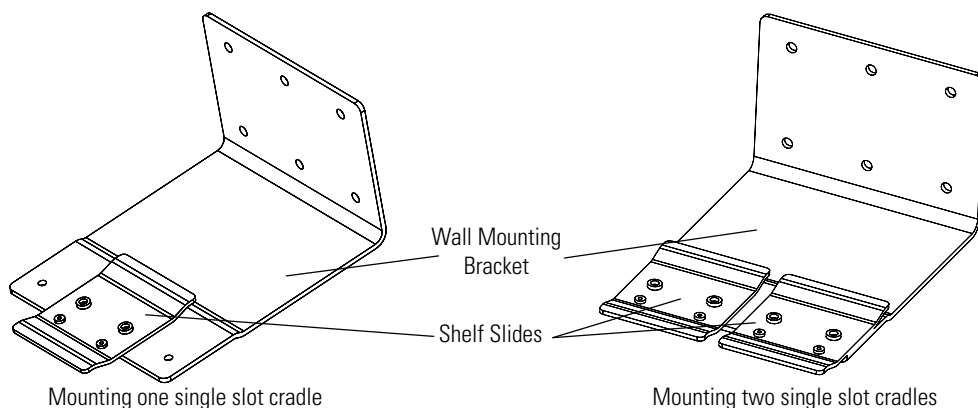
Wall Mounting Bracket with Shelf Slide
